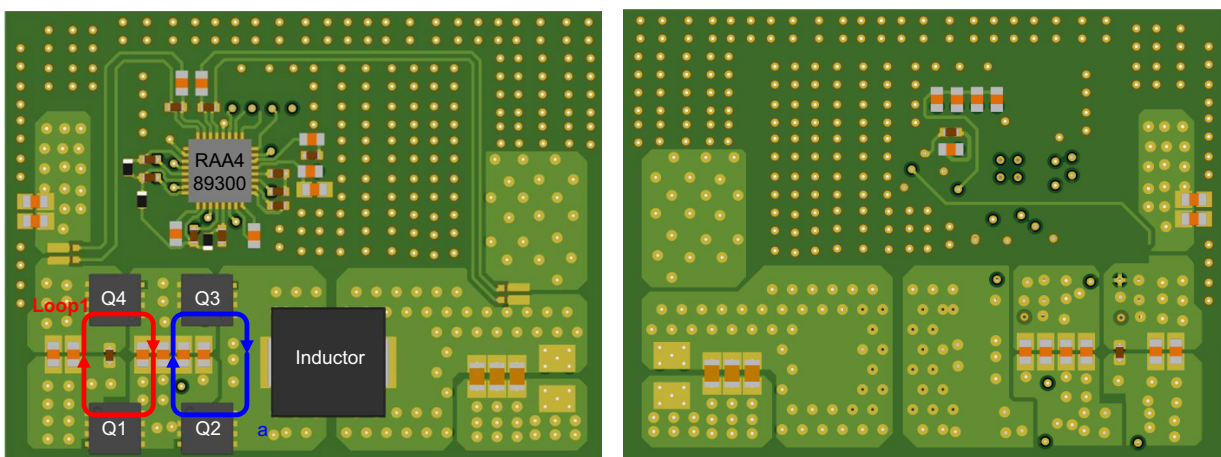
Top Side (left) and Bottom Side (right) of the Example Layout
